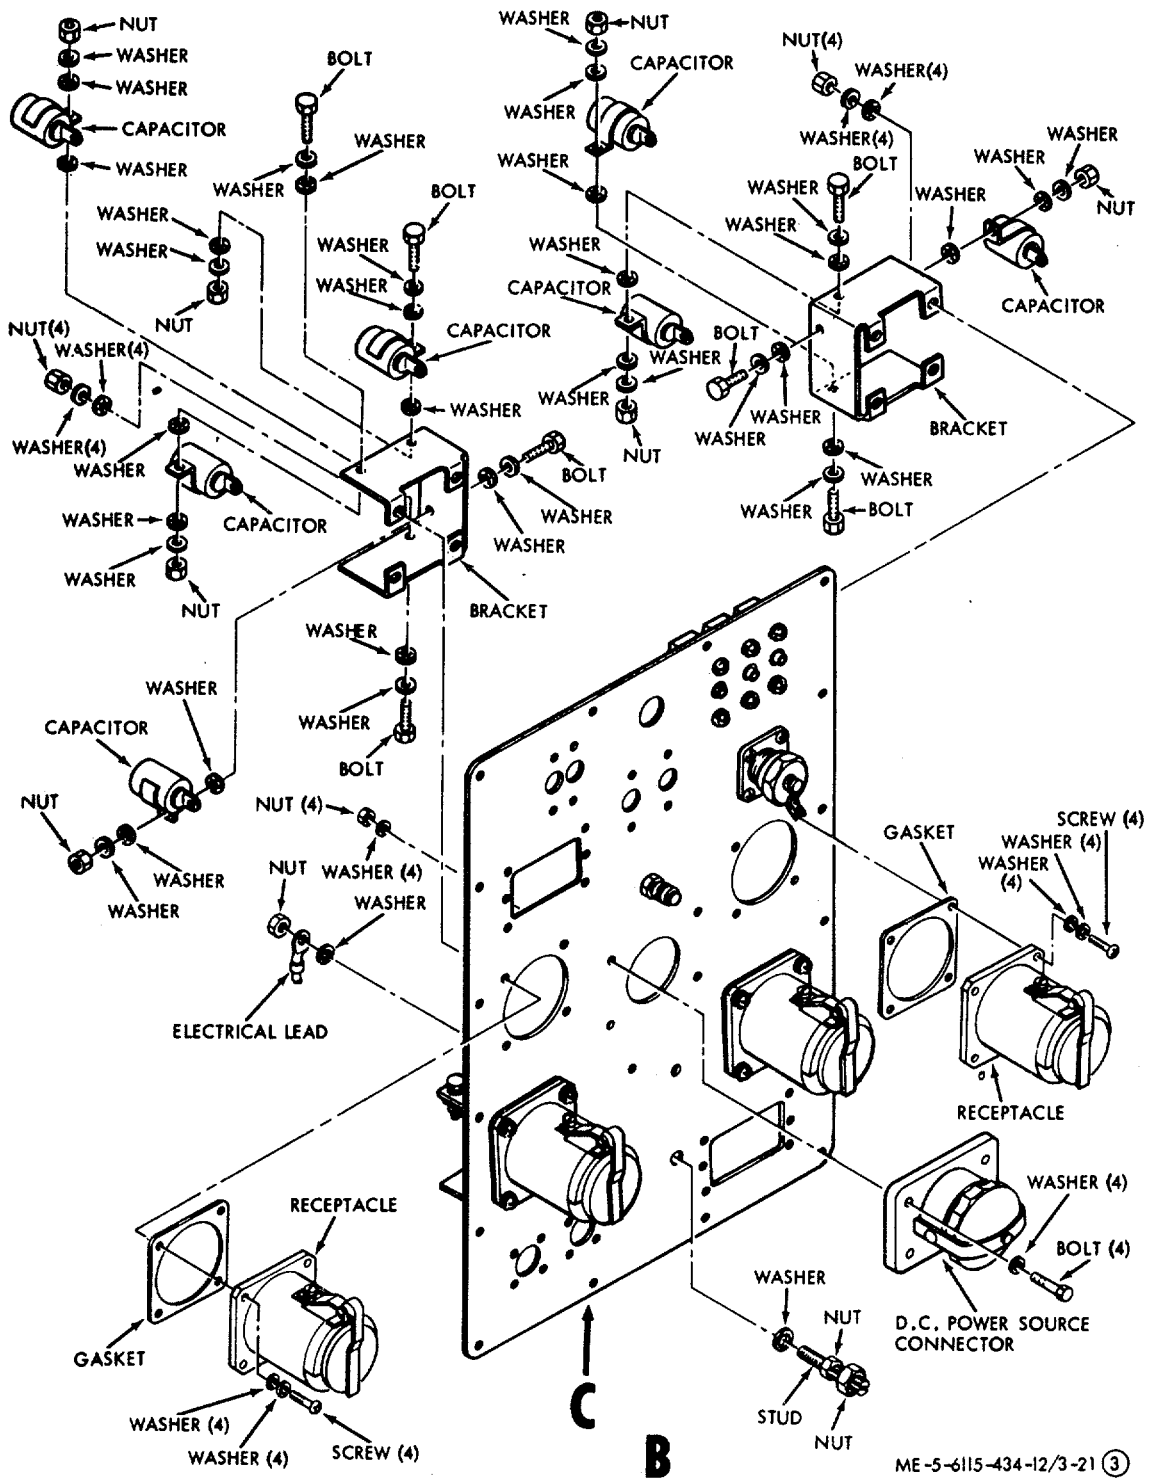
Receptacle panel assembly component replacement (Sheet 3 of 4).
